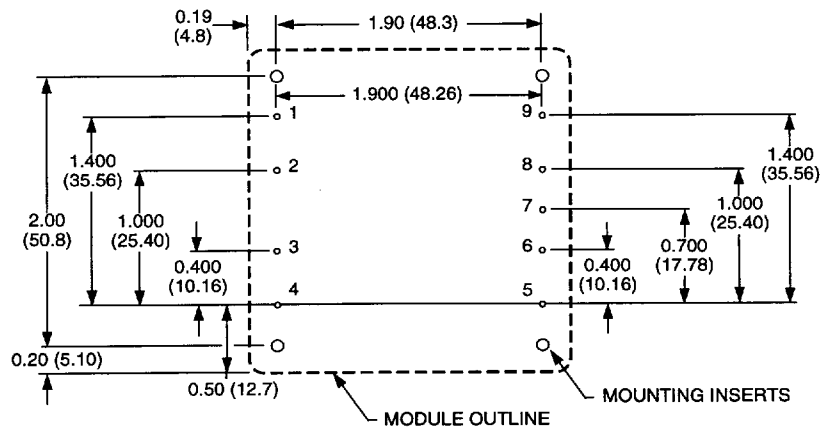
Dimensions of the PCB. The diagram shows a rectangular PCB with various dimensions in inches and millimeters. Key dimensions include: overall width 1.90 (48.3), overall height 2.00 (50.8), standoff height 0.28 (7.1) at 4 places, mounting insert hole diameter 0.19 (4.8), and various internal spacing dimensions like 0.20 (5.10), 0.50 (12.7), 0.400 (10.16), 0.700 (17.78), 1.000 (25.40), 1.400 (35.56), and 1.900 (48.26).
